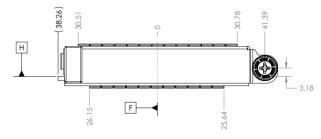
Small Form Factor OCP NIC 3.0 Card with Pull Tab CTF Dimensions (Side View)
